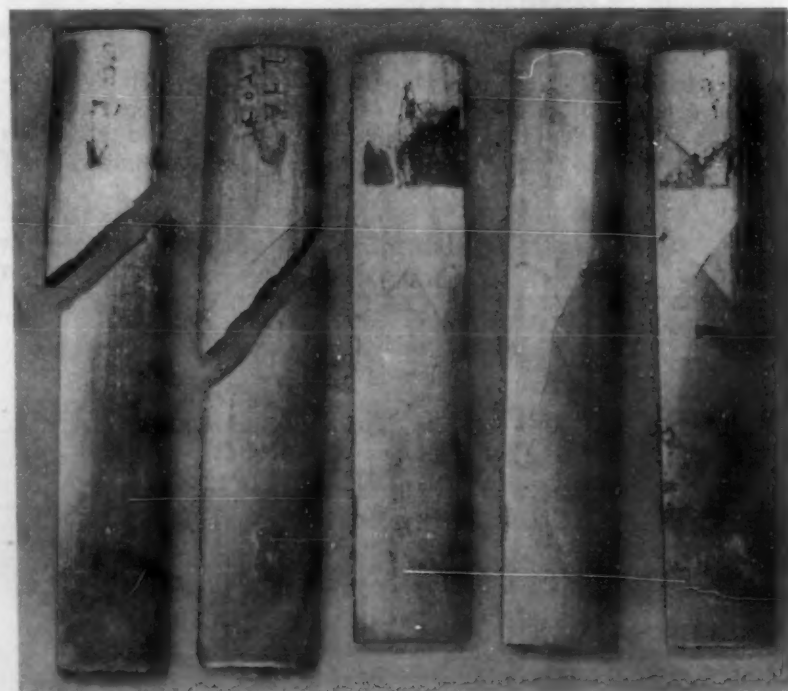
Fig. H. Failures of airplane streamline wires tested in alternating torsion endurance testing machine.
